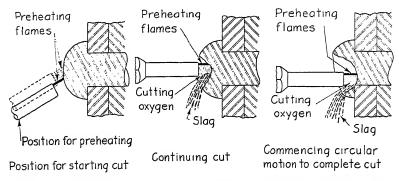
Positions of low velocity nozzle in cutting buttonhead rivets.
